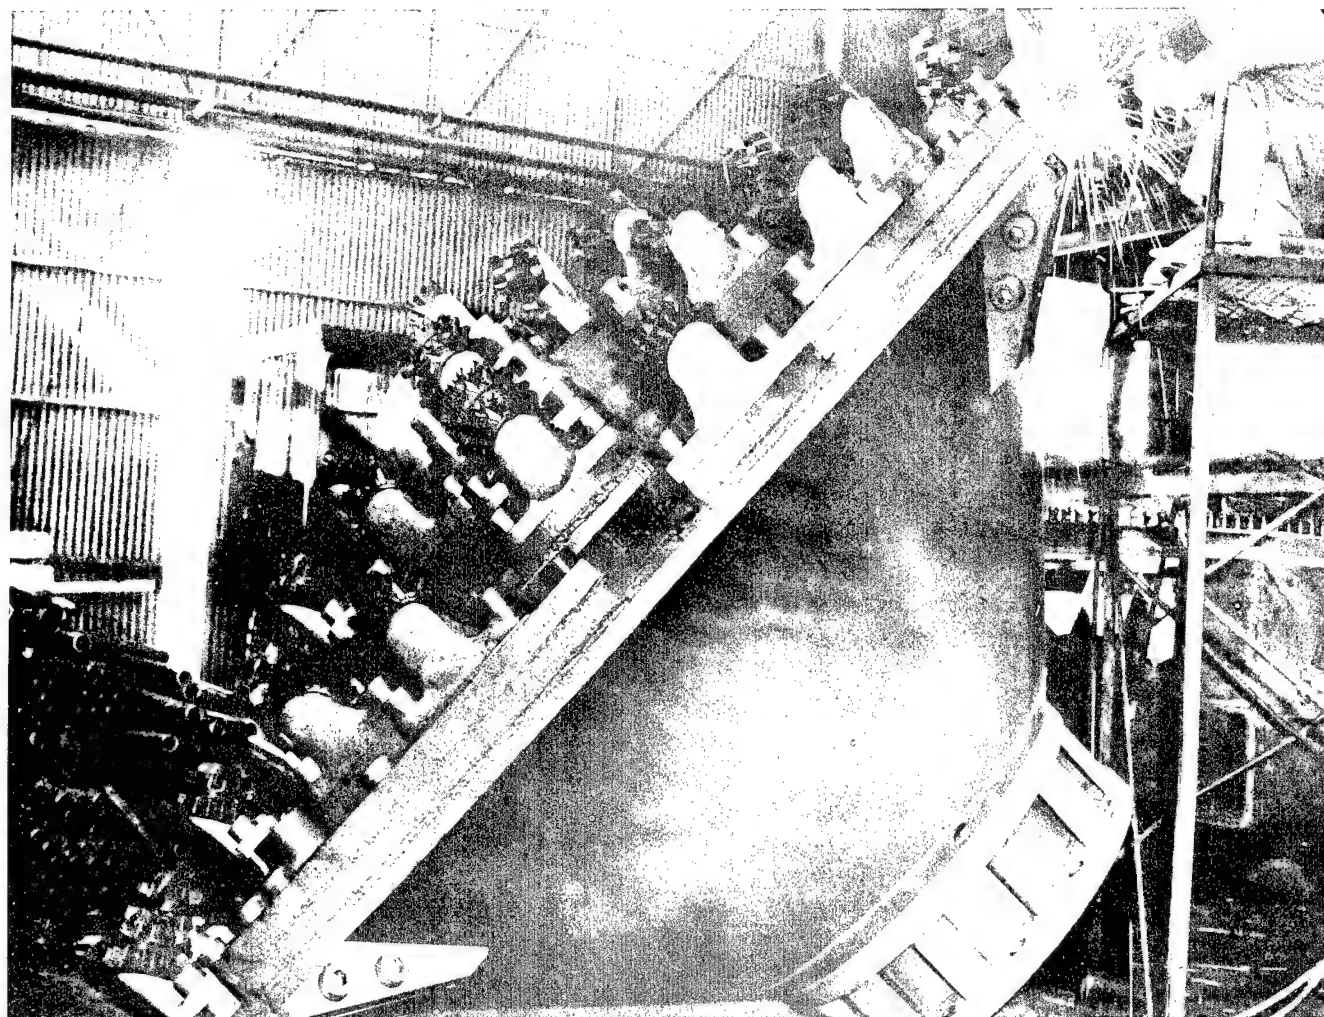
View of a plate type large diameter drill bit. Photo-Hughes Tool Company.
